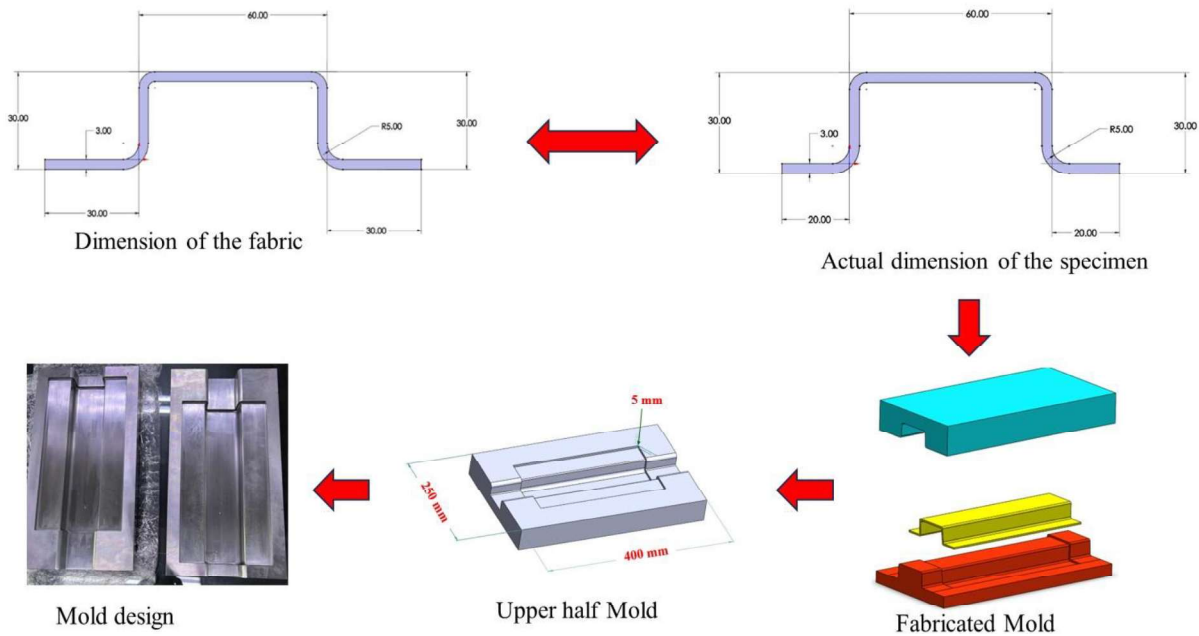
Mold design for the fabrication of the hat-shaped BFRP composite
